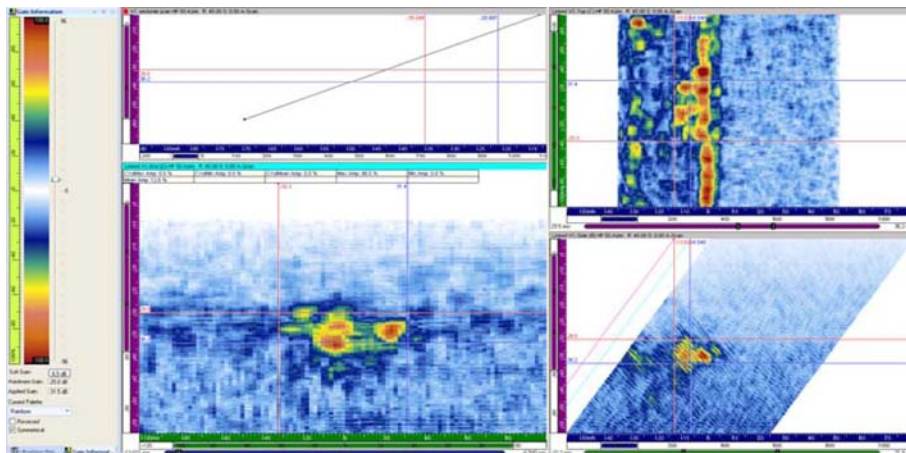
Specimen 9C-034 Flaw 2 Before Weld Crown Removal at 1.5 MHz, 60 Degrees
